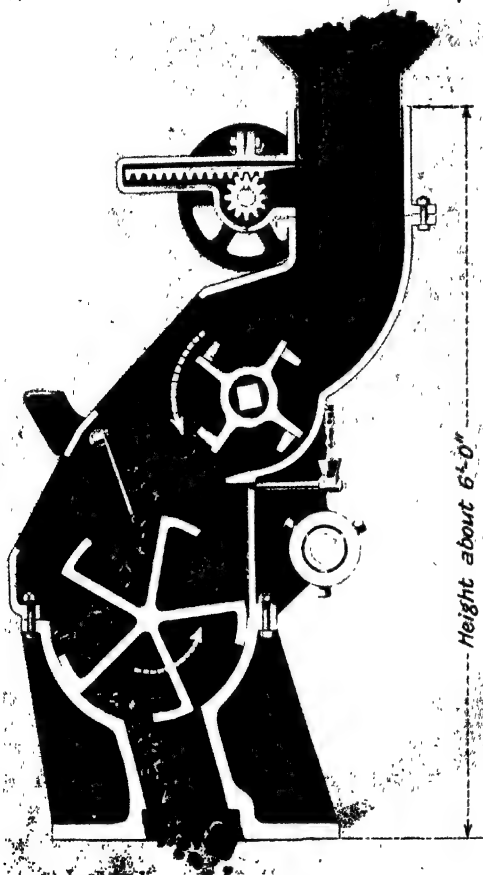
COAL FEED FOR WELLMAN PRODUCER.
